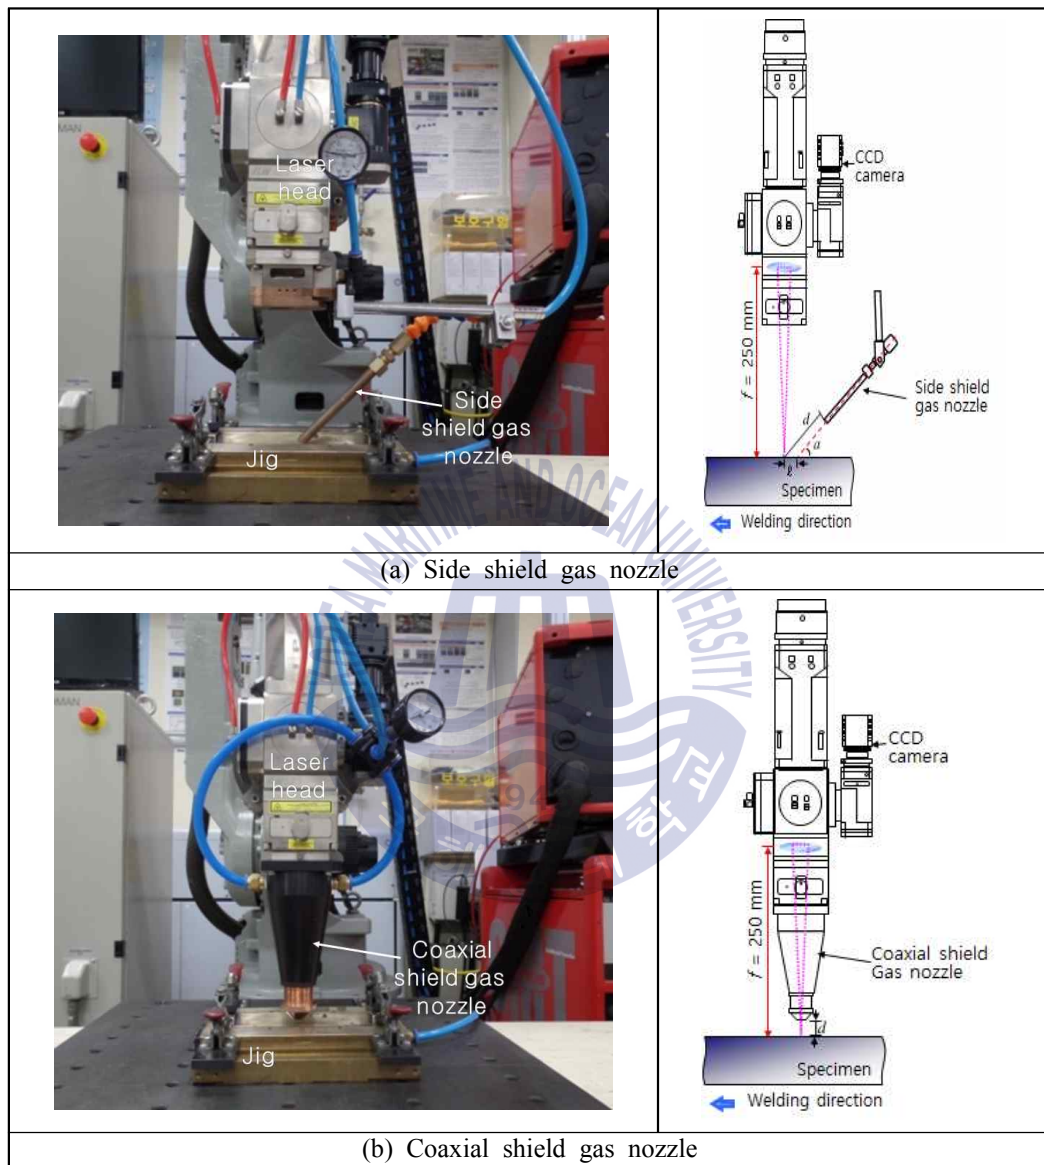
Setup of experimental equipment in 6 kW CW fiber laser
